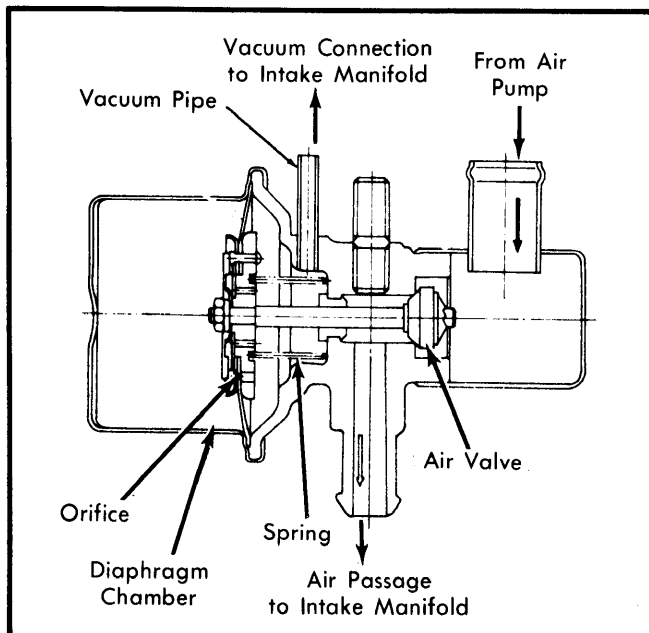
Sectional View of Mixture Control Valve (Calif.)
